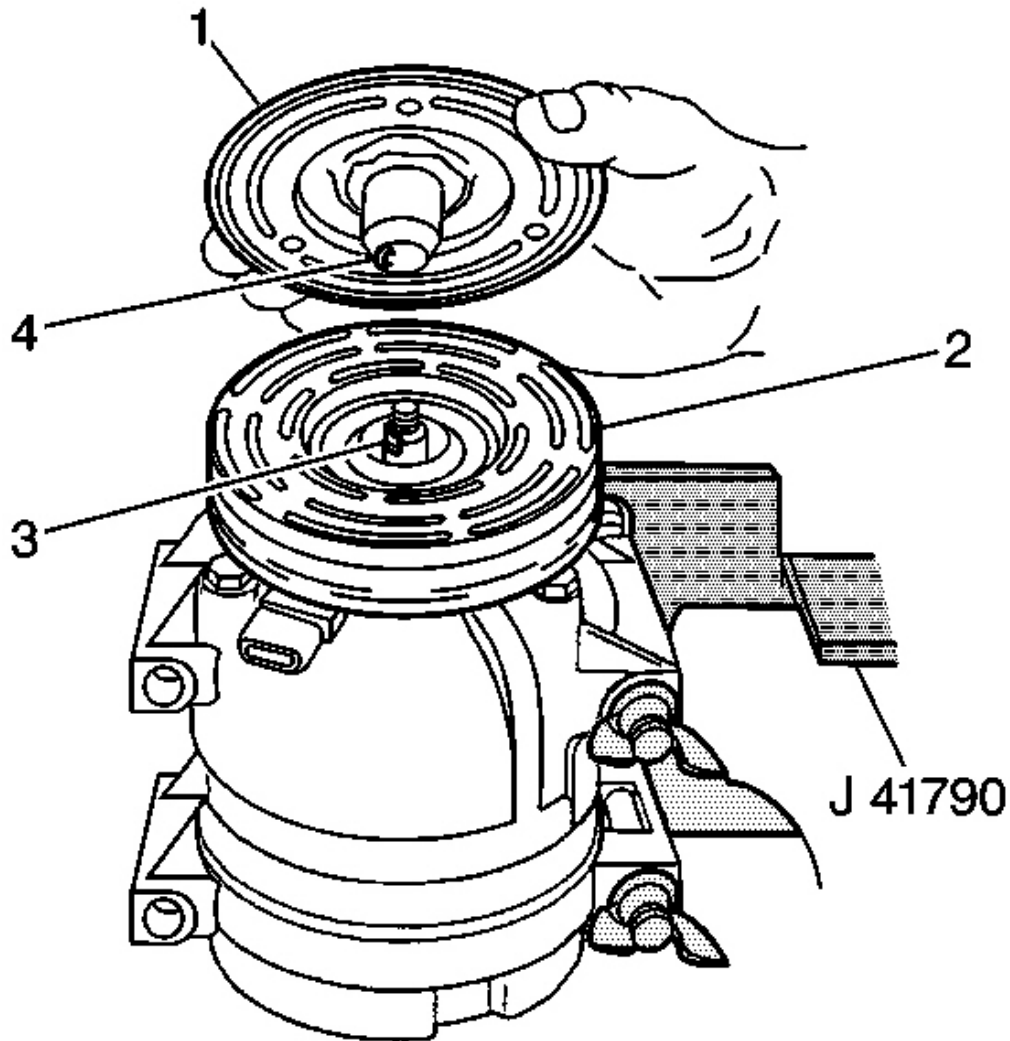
Hub Key Groove, Clutch Plate, Clutch Rotor & A/C Compressor Shaft
